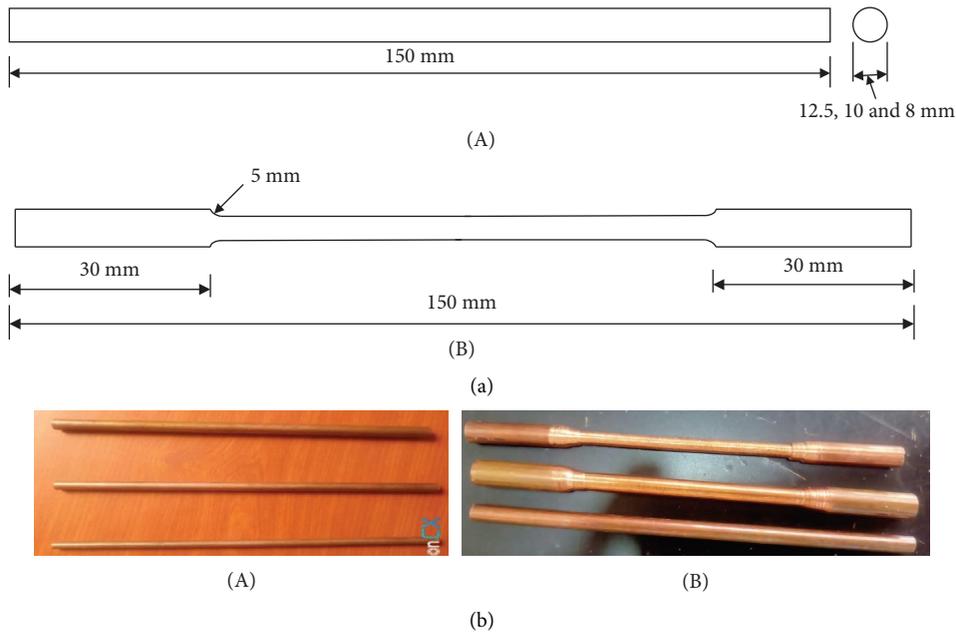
(a) Schematic representation of the tensile specimen of extruded and machined samples. (b) Tensile testing specimens of C18150 alloy.
